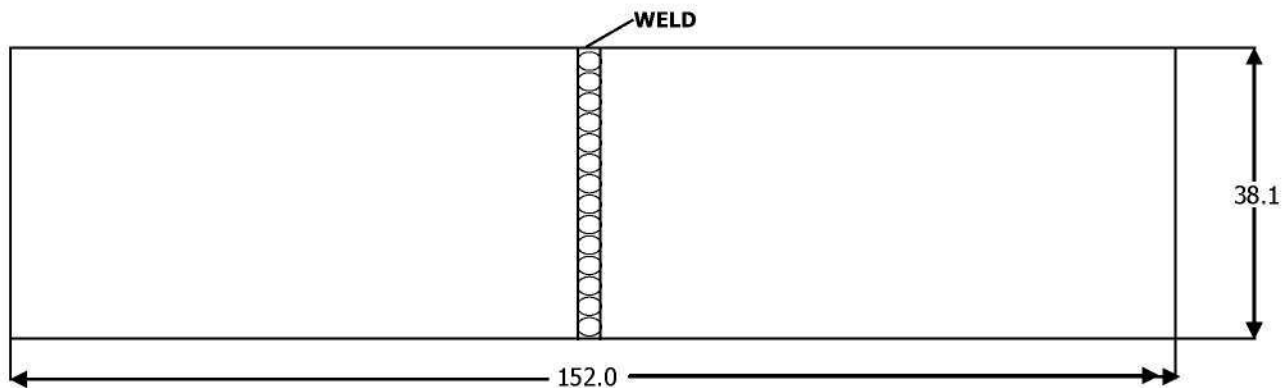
Schematic of bend test specimen, dimensions in mm
